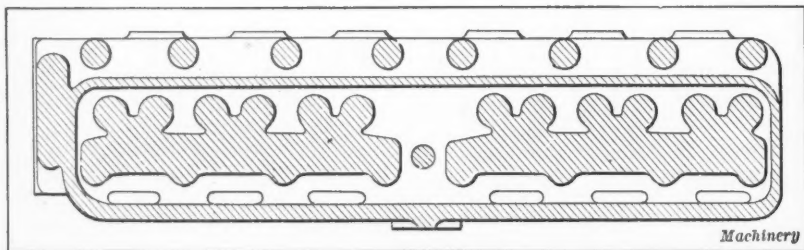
Diagram of Cylinder-head Casting showing, in Section, the Areas milled on the Machine shown in Fig. 5
